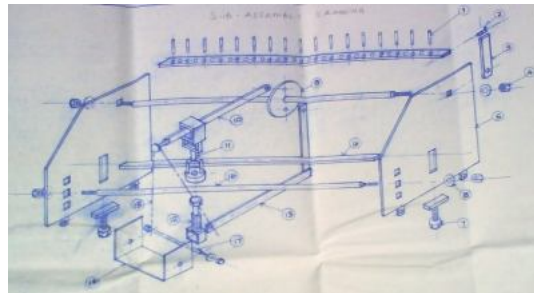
(b) Sub Assembly Drawing of Internal Combustion Engine Valve Installation Machine.
